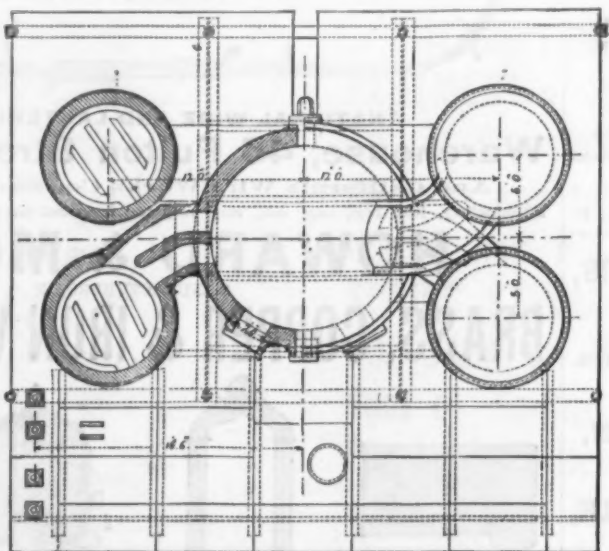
Horizontal Section and Plan of Regenerative Furnace.
